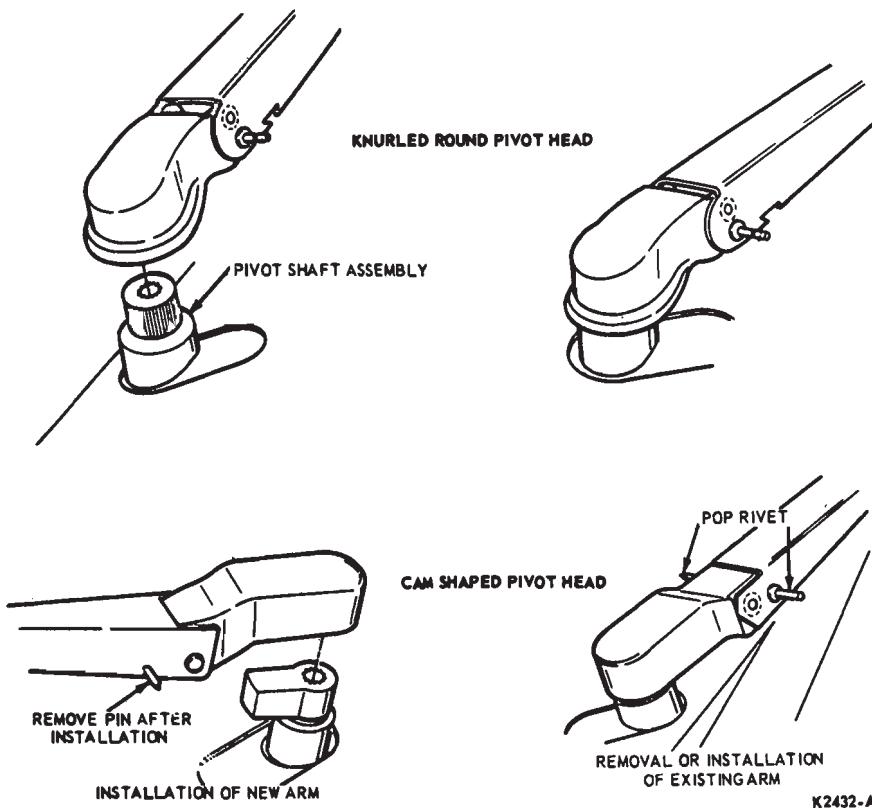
Installation of Arm and Blade Assembly to Pivot Shaft
